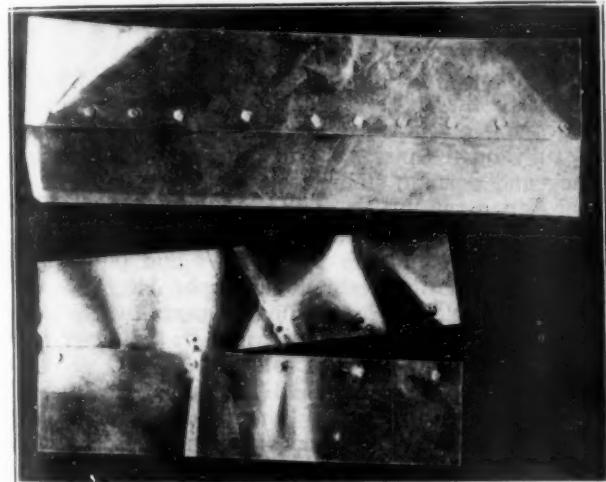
Electric Spot Welds on Aluminum Sheet 0.024 in. thick
